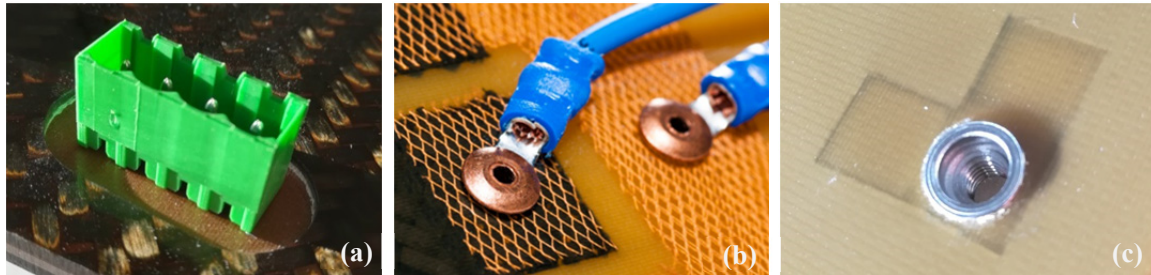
connection concepts: Discretely soldered connector plug (a); Blind rivets with cable shoe (b); Rivet nuts (c)
